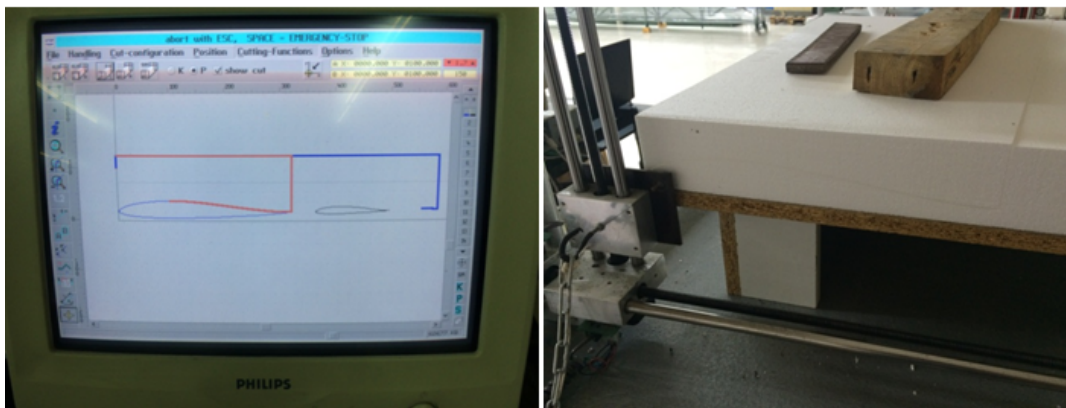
Production of Wing Piece 1 and 2 in hot wire CNC foam cutter
